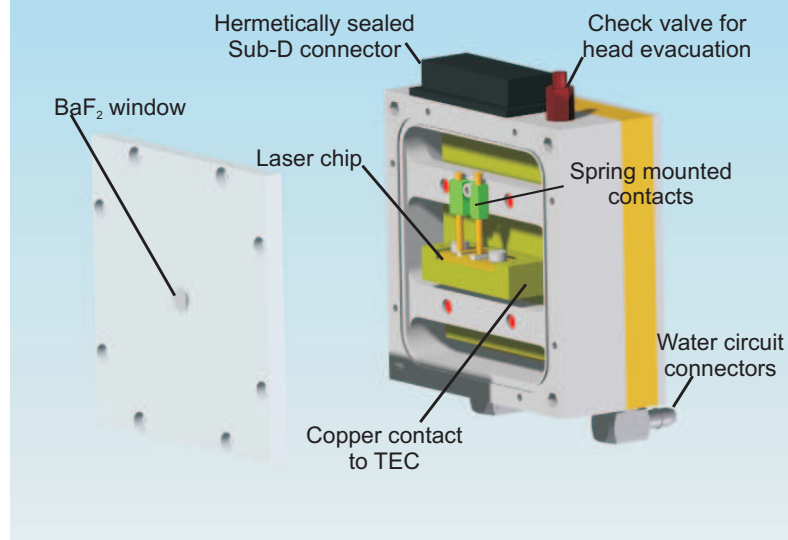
Exploded diagram showing design for prototype laser mount.
